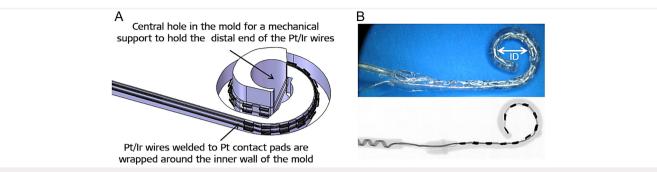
A, B. Fabrication of pre-curved electrode type. (A) Mold tooling showing groove in which the platinum/iridium wires are positioned and the central hole for the cam fixture to keep the wires under slight tension. (B) Prototype of a pre-curved electrode.
